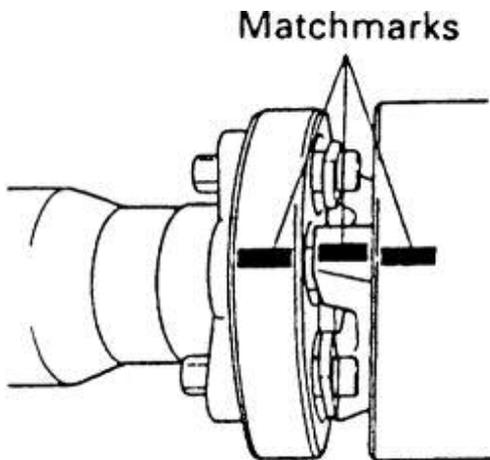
Paint matchmarks on the rear coupling, flange and crank pulley
